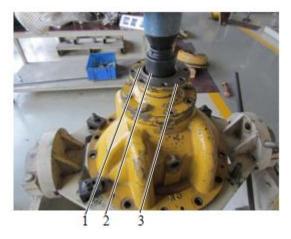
1 Locking nut 2 Washer 3 Input flange 2 Remove the locking nut with appropriate tools, and remove the input flange and the gasket.
